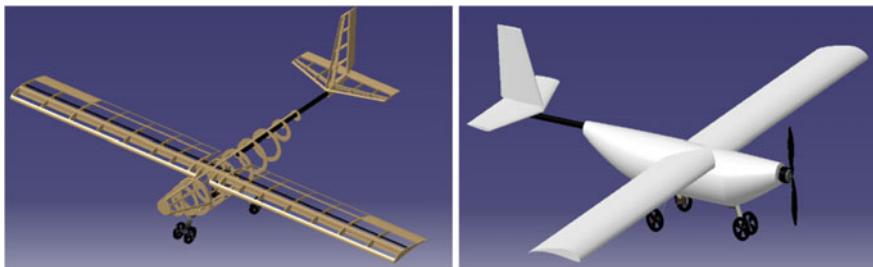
Detailed structural design (left) and detailed surface design (right)
